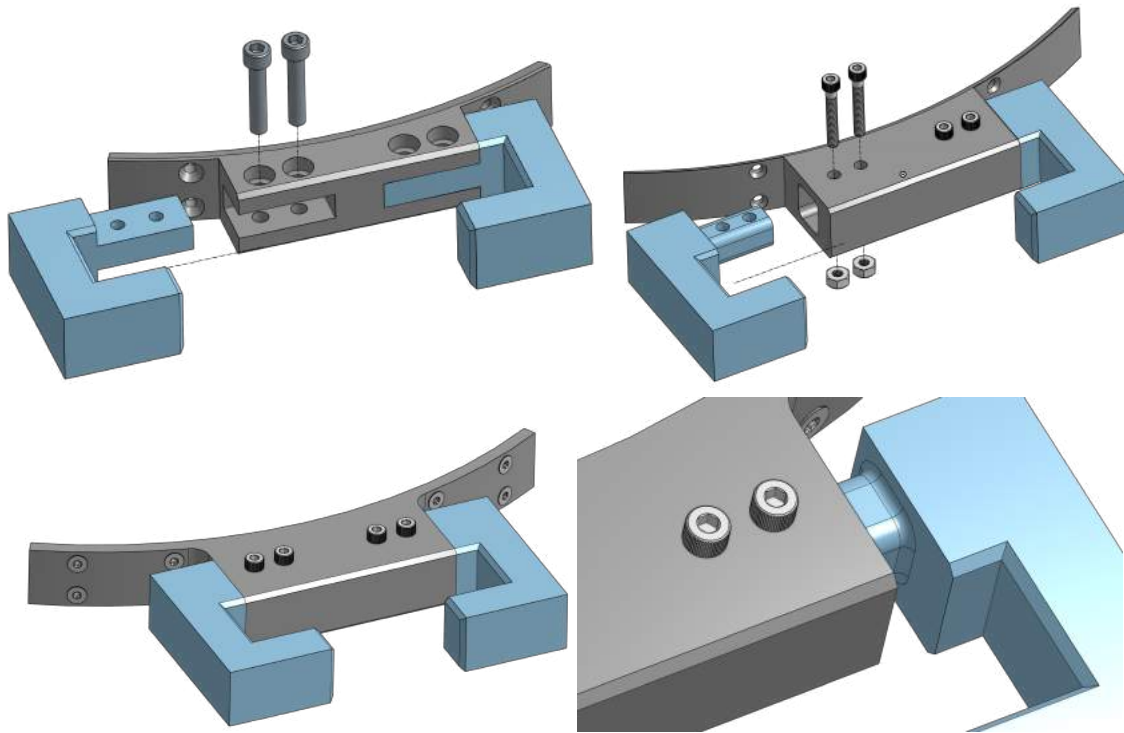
TOP LEFT: Previous launch lug assembly built into an arc clamp with removable brackets shown in blue held in place with socket head fasteners. TOP RIGHT: V1 Launch Lugs assembly with removable brackets now inserted into a slot. BOTTOM LEFT: V3 Launch Lugs assembly with four more fasteners added. BOTTOM RIGHT: Close-up view of fillet added for V3 launch lug
